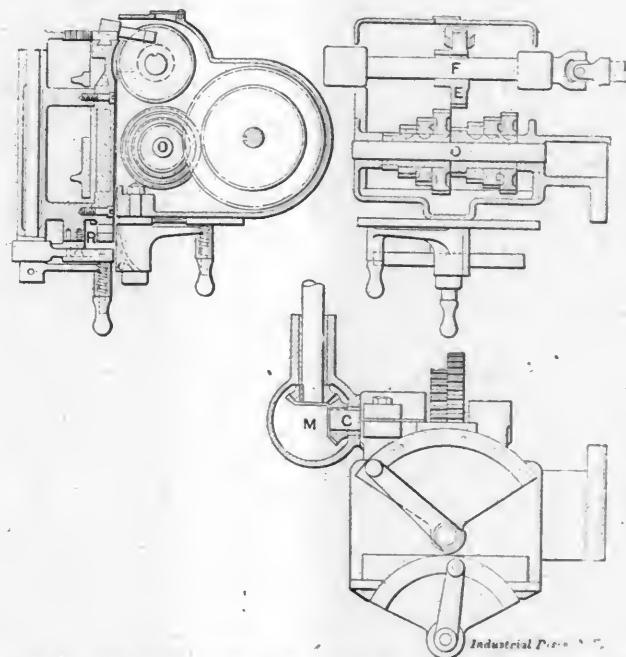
SECTIONAL VIEWS OF LOWER EIGHT-SPEED MECHANISM.
